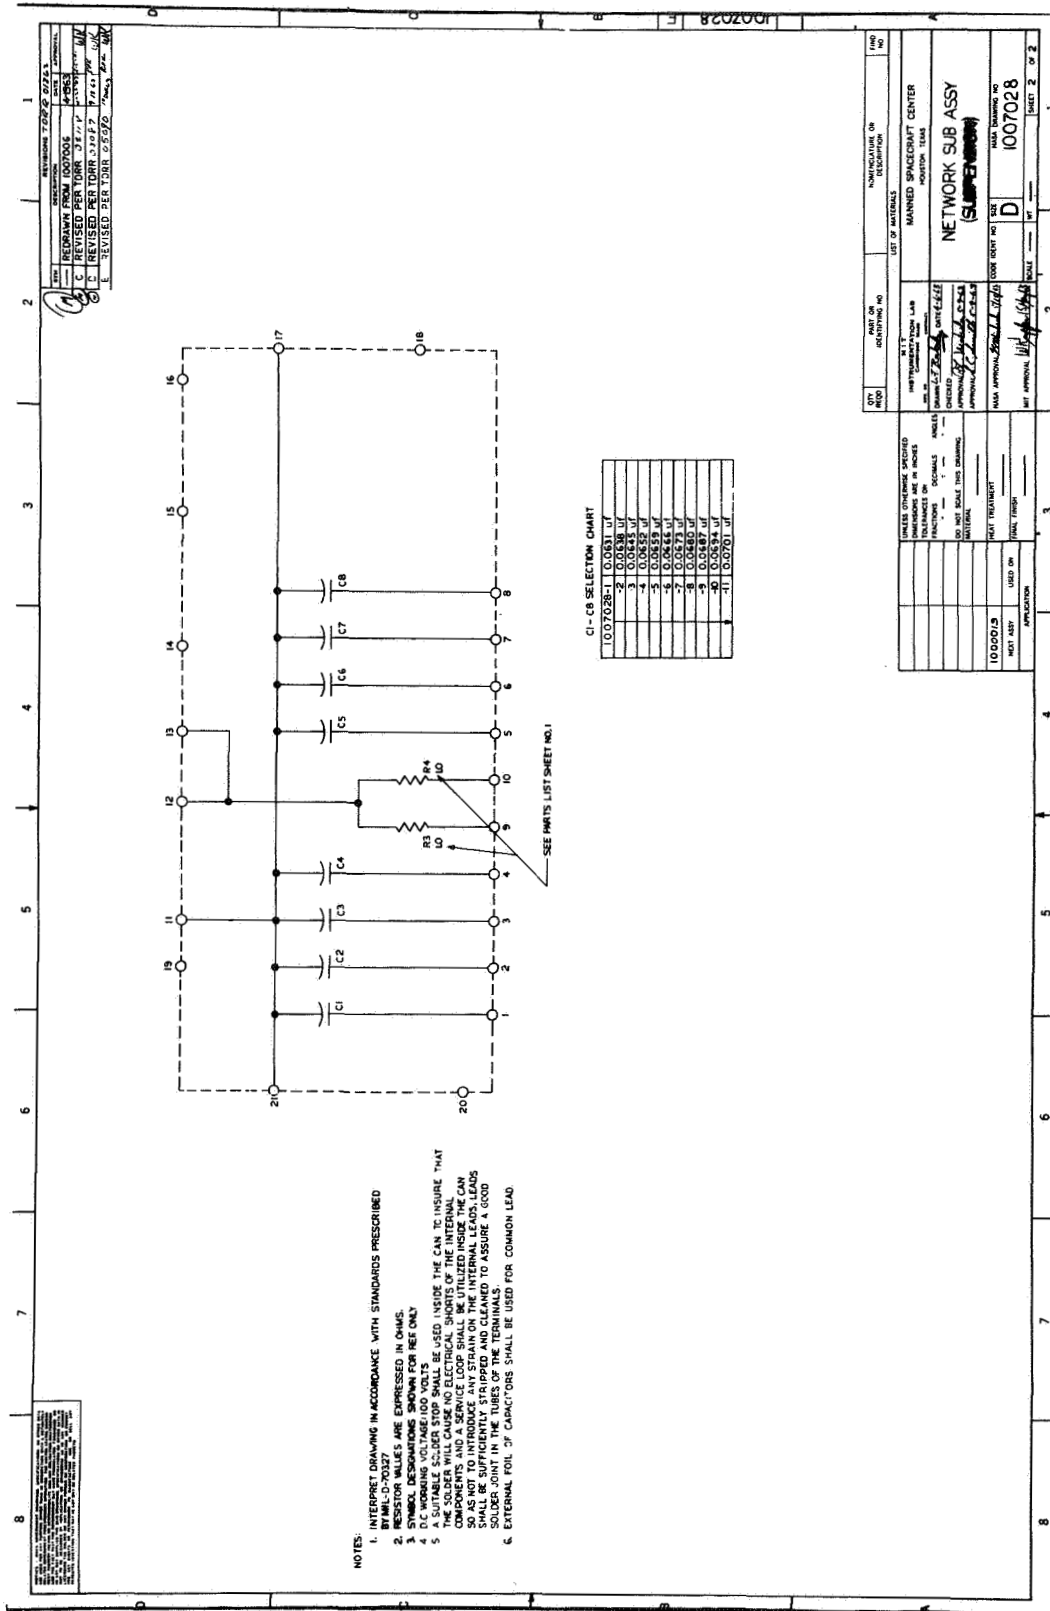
Sample Subassembly Drawing (Sheet 2 of 2).
